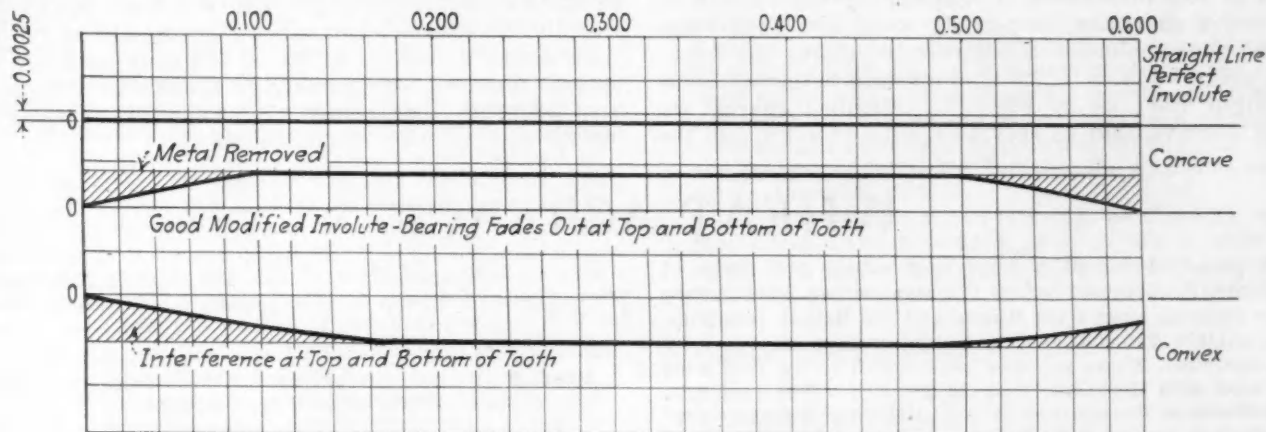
CHART PLOTTED BY THE GEAR-TESTING DEVICE SHOWING THE TRUE INVOLUTE AND MODIFIED CURVES
